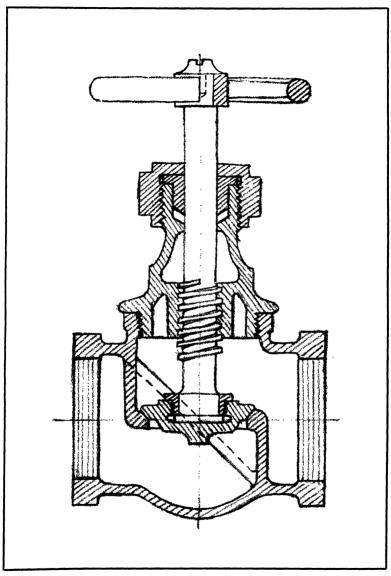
Sketch which Would be Difficult to Proportion, Excepting by Building It Up from Carefully Drawn Foundation Lines
